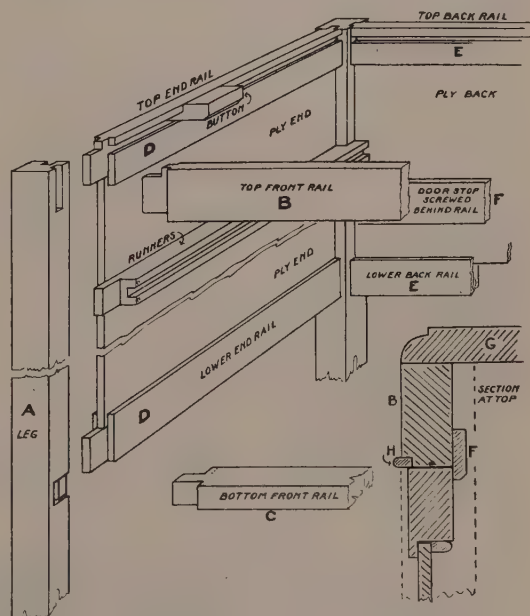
SKETCH VIEW OF CONSTRUCTION.
